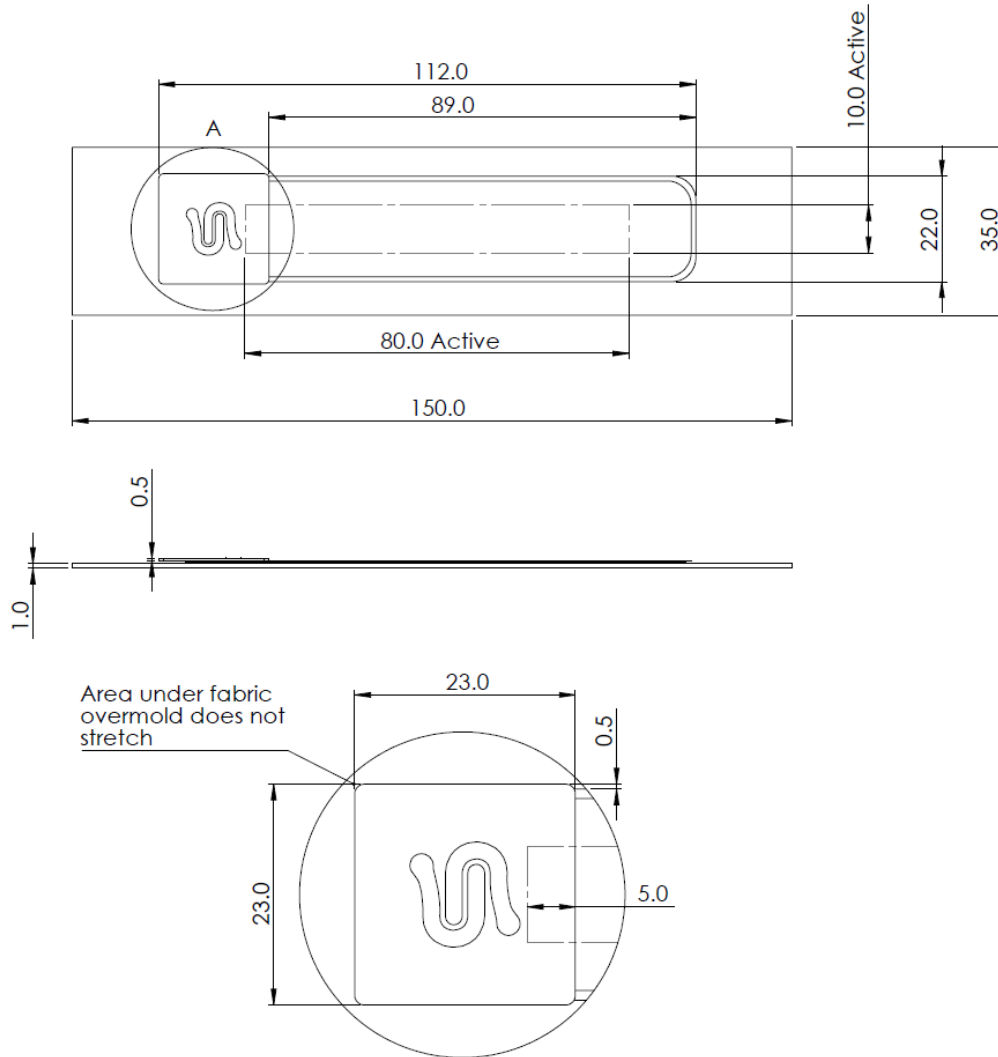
Engineering Drawing of a StretchFABRIC Sensing Element
